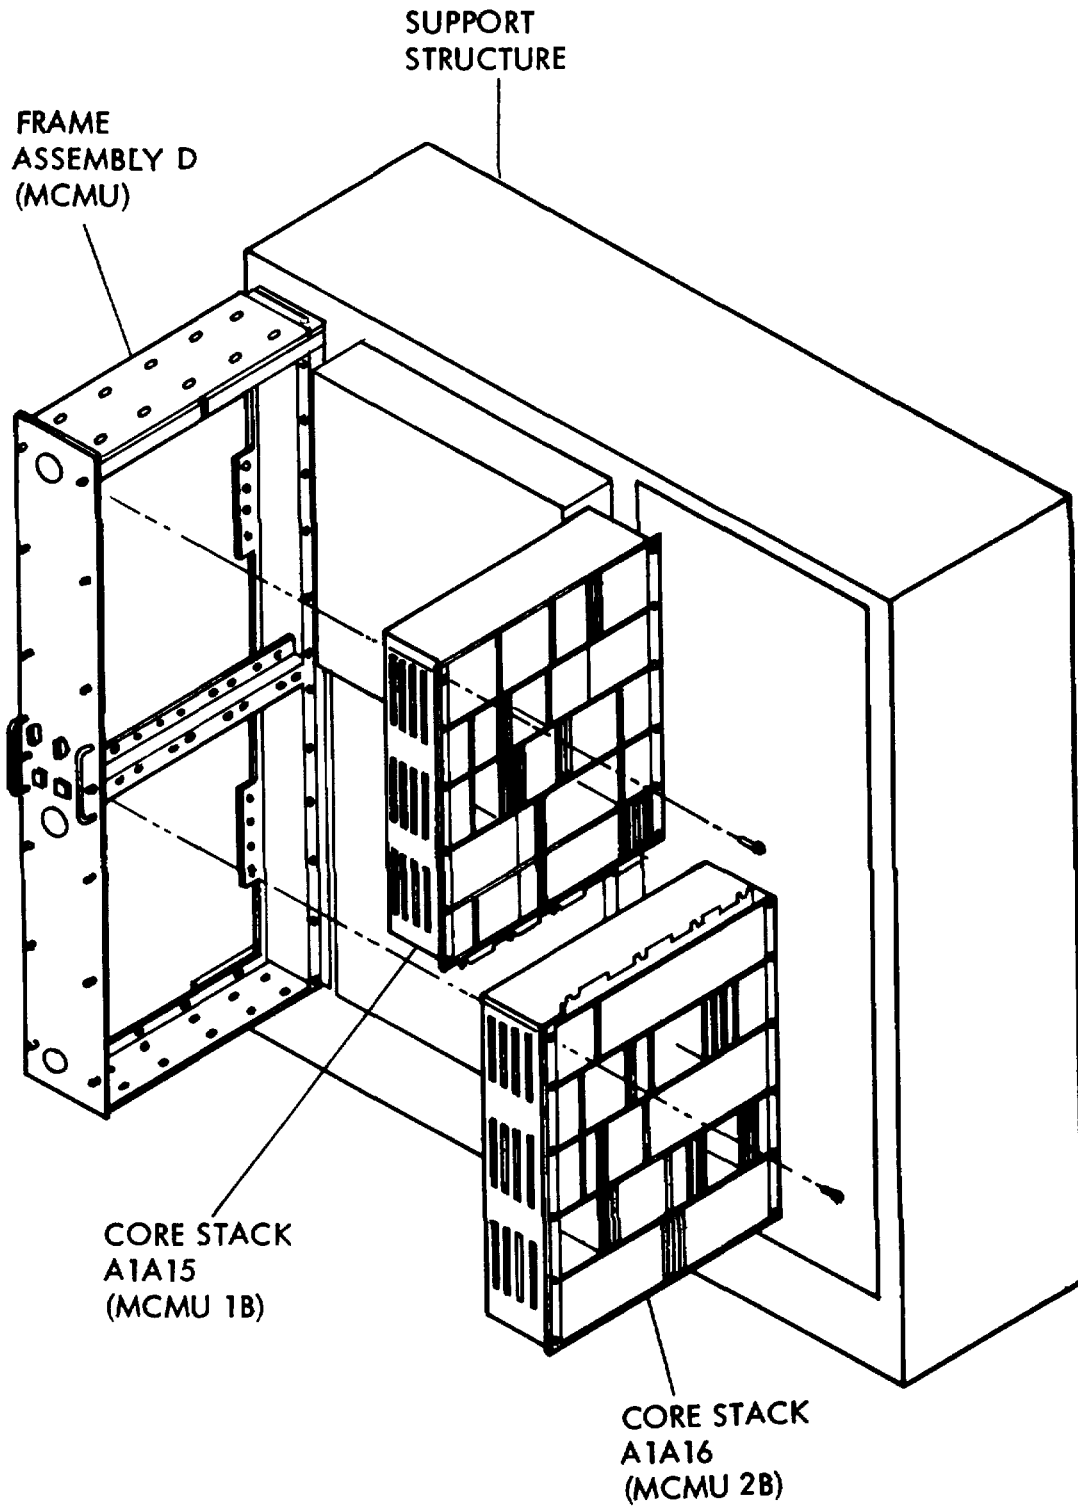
Circuit Switch ADP Assembly Sheet 5 of 5).
